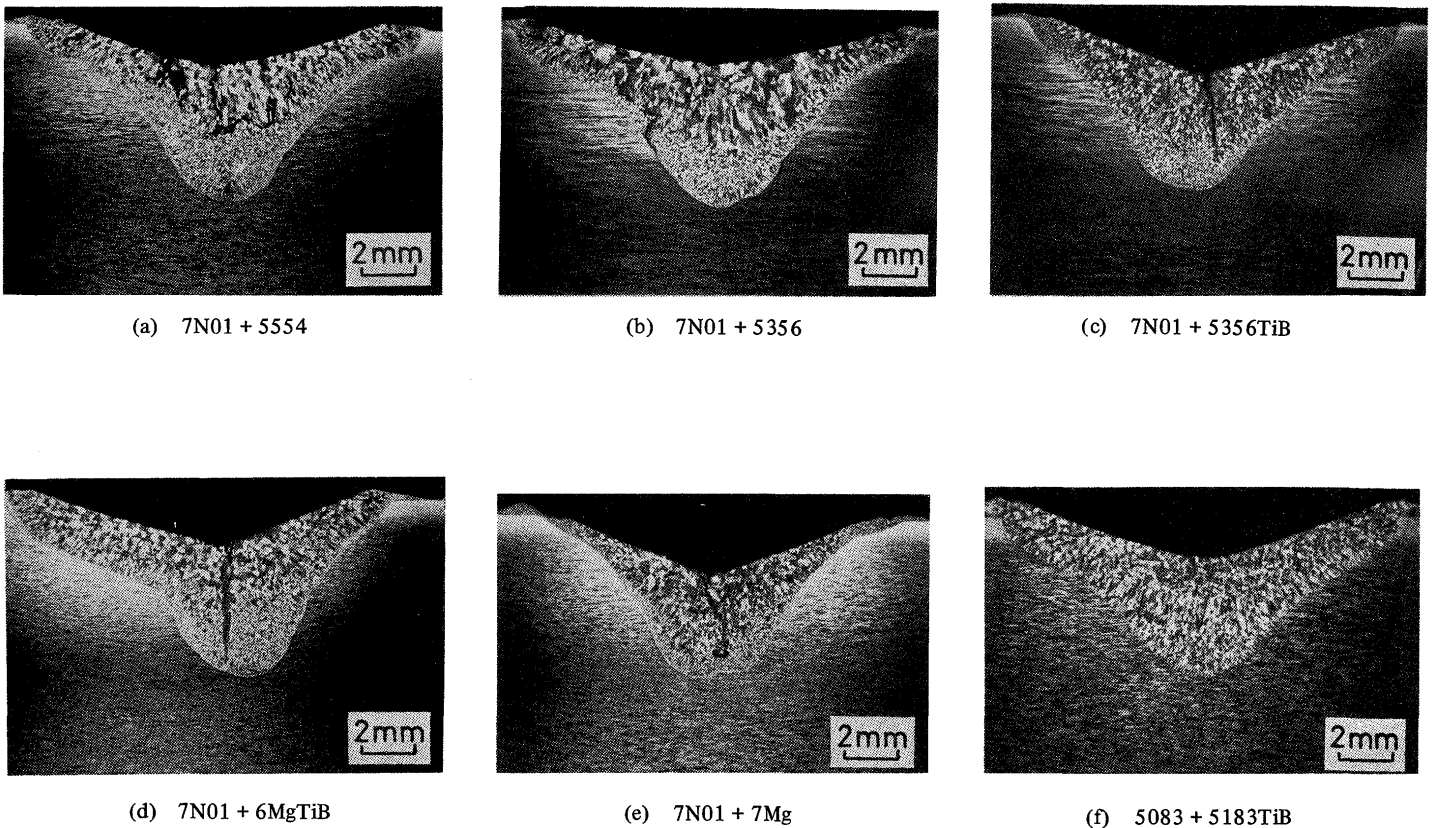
Cross-sectional photographs of weld crater at welding condition of 270A and 400 mm/min.
